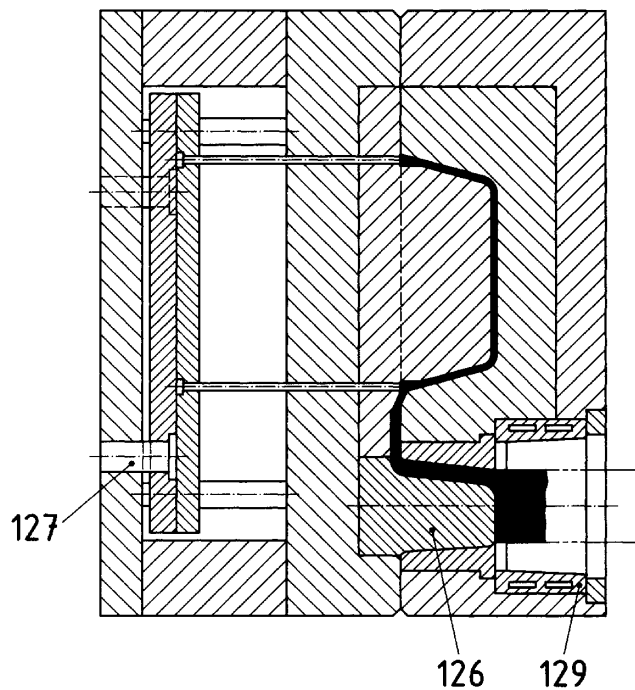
Diecasting die for cold-chamber diecasting machine with horizontal pouring sleeve
